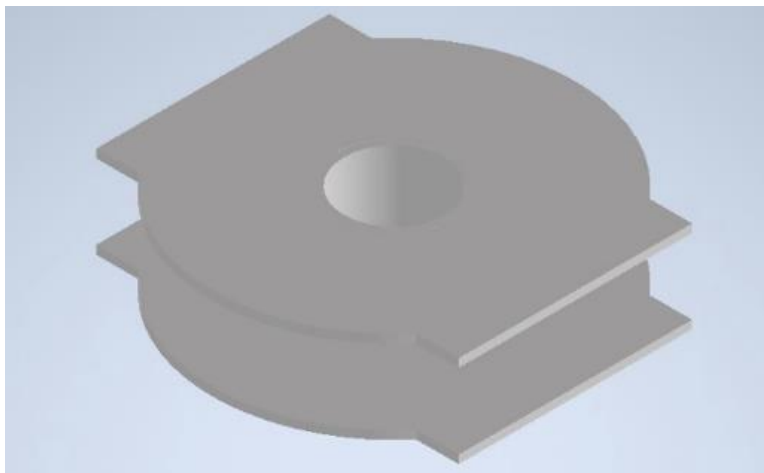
AutoCAD design of bobbin which housed the magnet's coil. The bobbin matched the interior dimensions of the yoke, properly aligning the core which was fit through the center of the bobbin.
